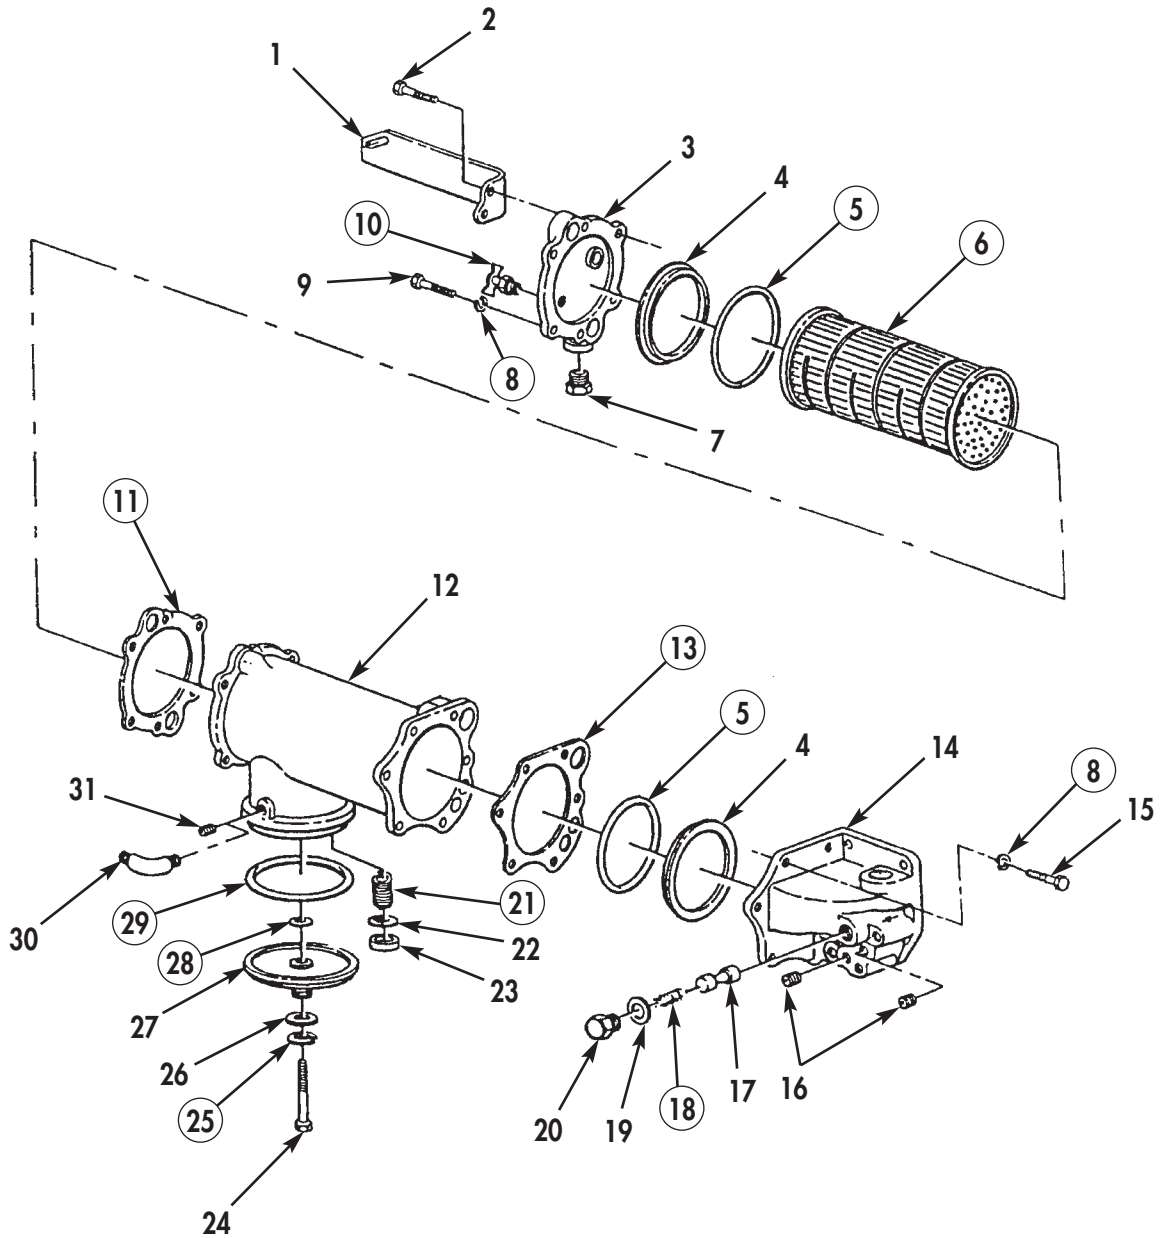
Oil Cooler Disassembly—Big Cam I Engine.
